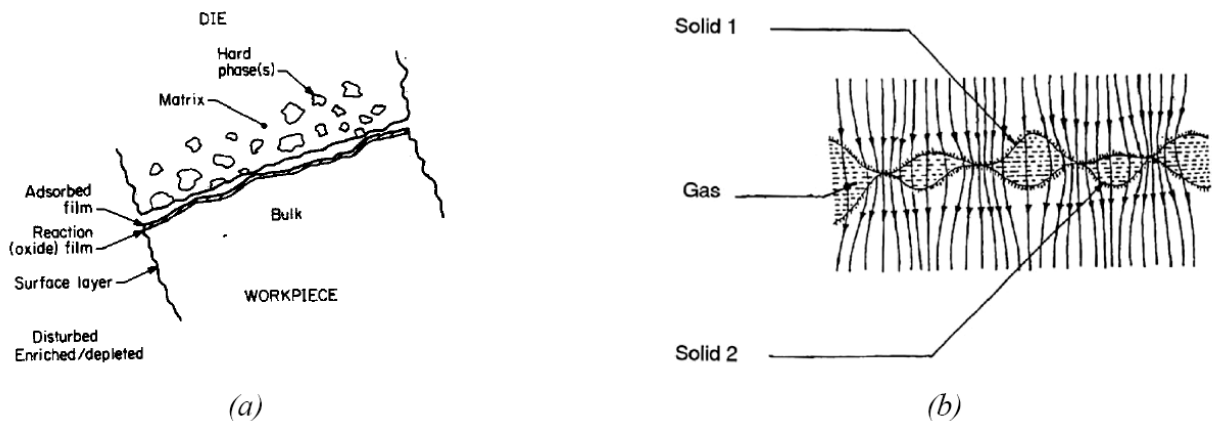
Die-workpiece interface on a micro-scale (a) [43] and heat flow through a joint (b) [44]
